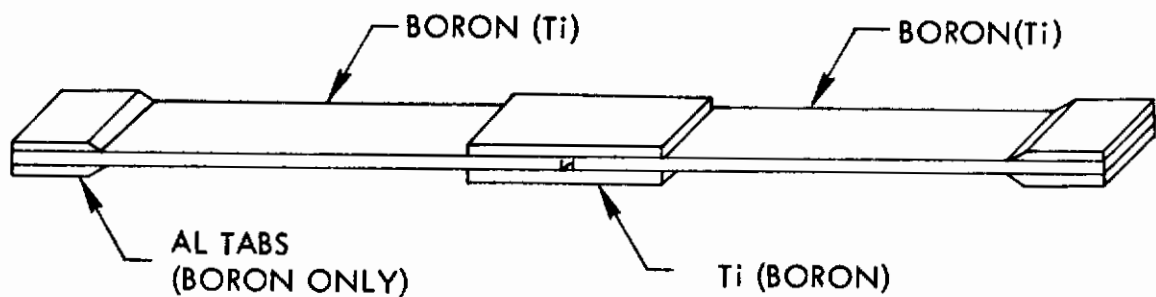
EDGE VIEW OF CONFIGURATION "C" SPECIMEN
